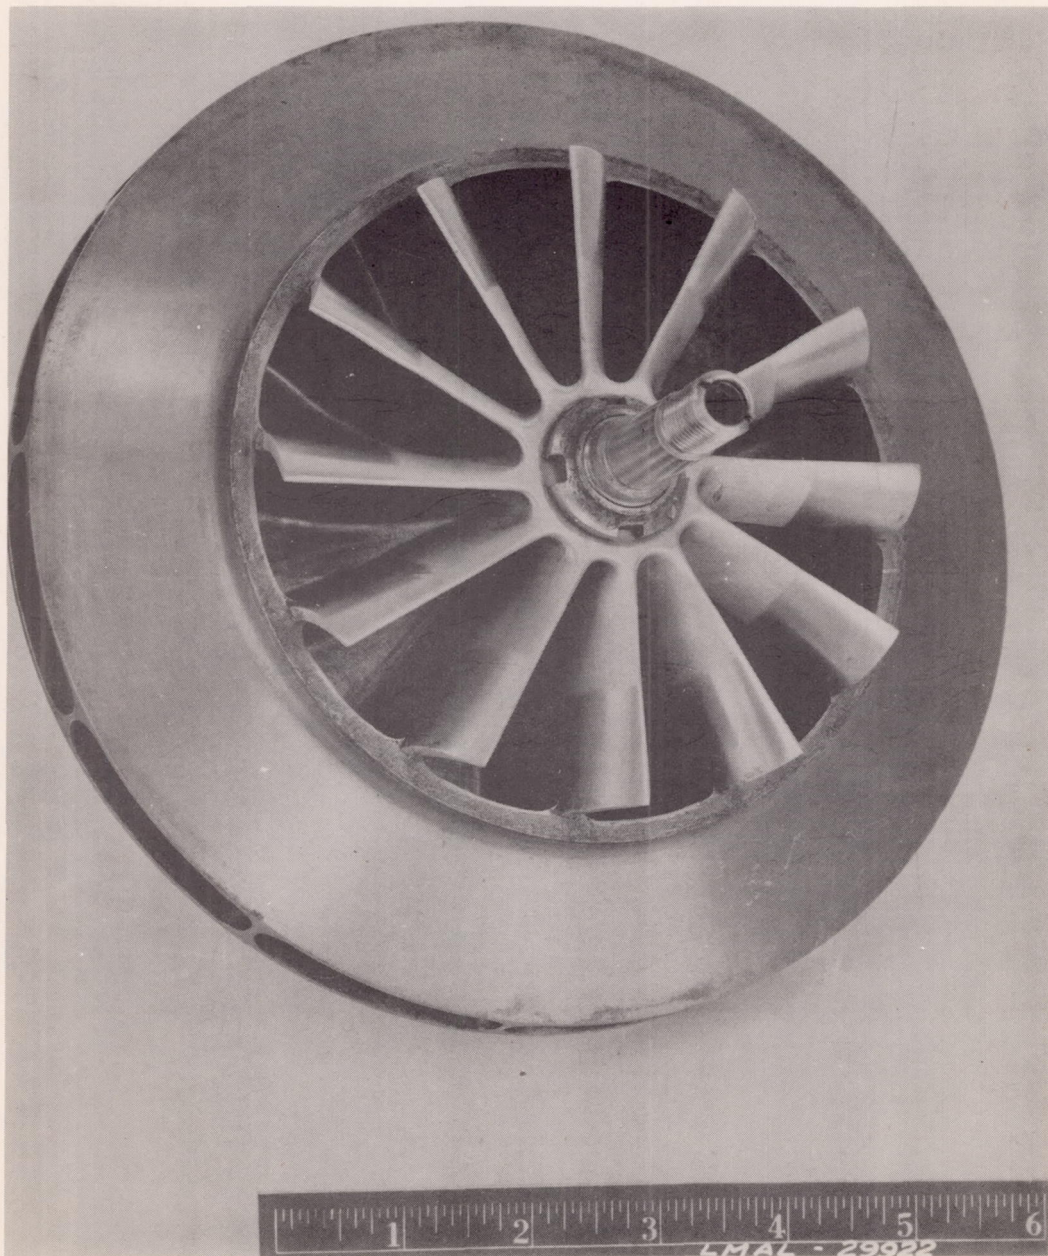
Assembly of supercharger from Junkers Jumo 211F engine.
